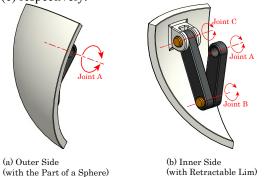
Oblique View of One Unit of the Three Dimensional Wheel-Leg Module
